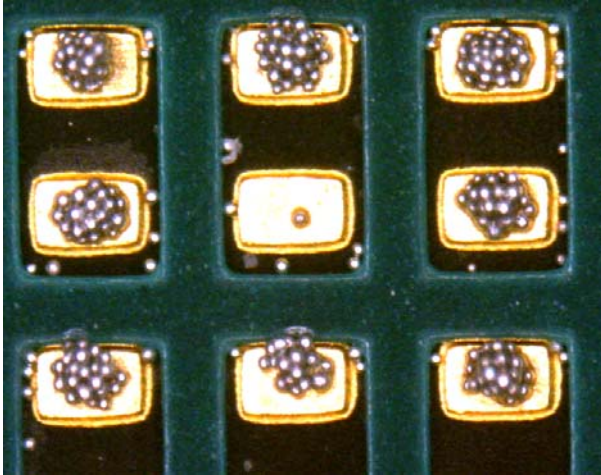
Solder deposition on 01005 pad with Square aperture. Paste type 3 and 4 mil thick
